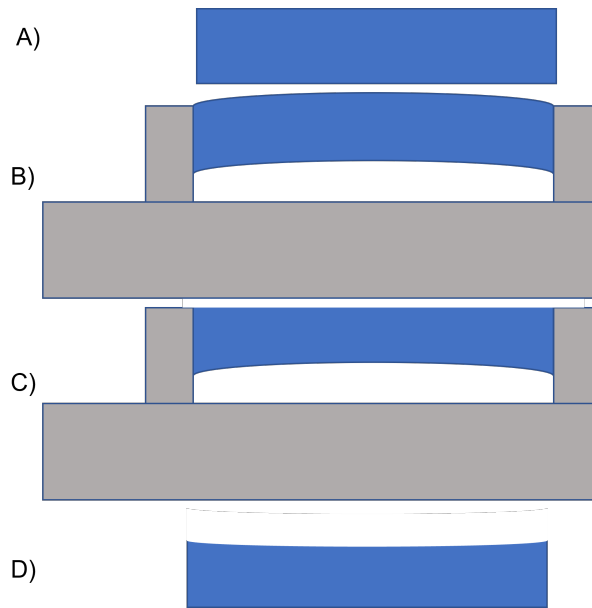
Deformation of the fixturing ring during manufacturing.
